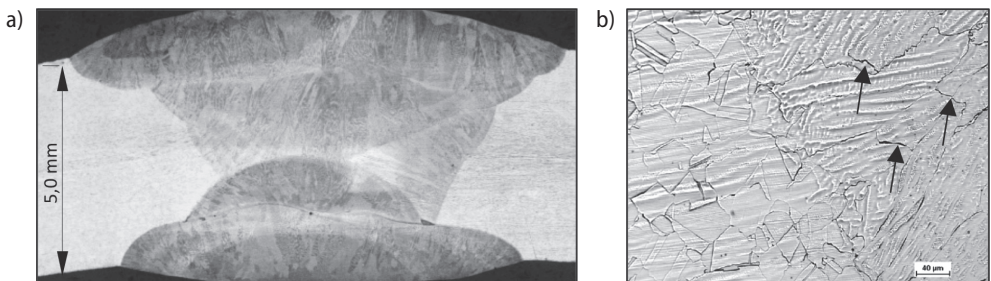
TIG weld structure (a) and DDC crack appearance (b) observed using a light microscope
